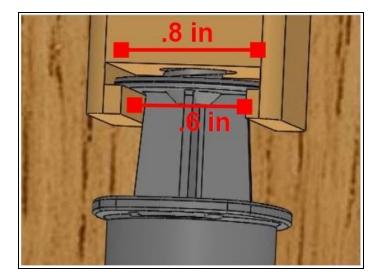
A closeup view of the interface between the plunger of the syringe and the slot in the holding cap with dimensions labeled in inches. The leadscrew is fed through the holding cap so it is still able to interface with the plunger to depress it upon controller activation
